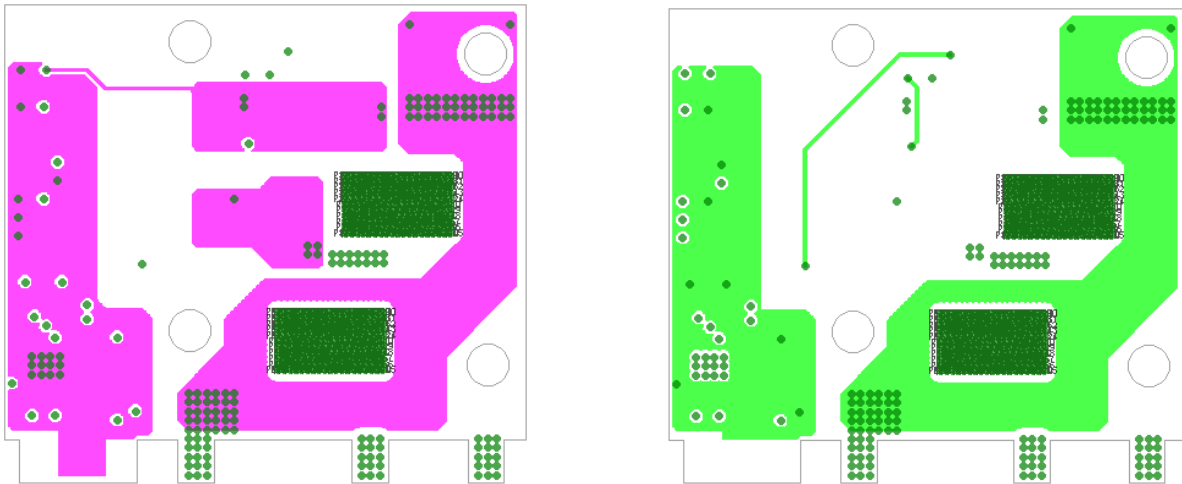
Inner Layers PCB Layout of SLOW LEG CARD
